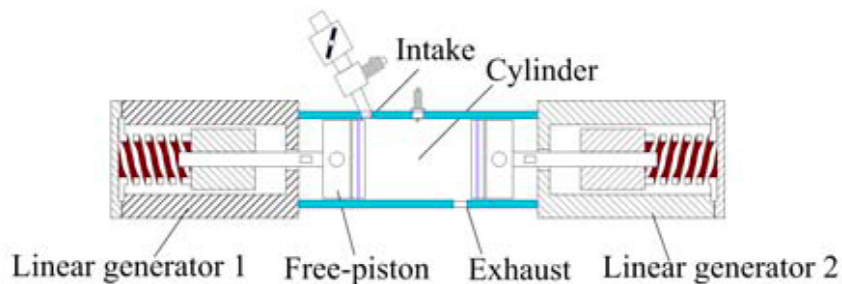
Opposed-piston free-piston linear alternator with mechanical springs
